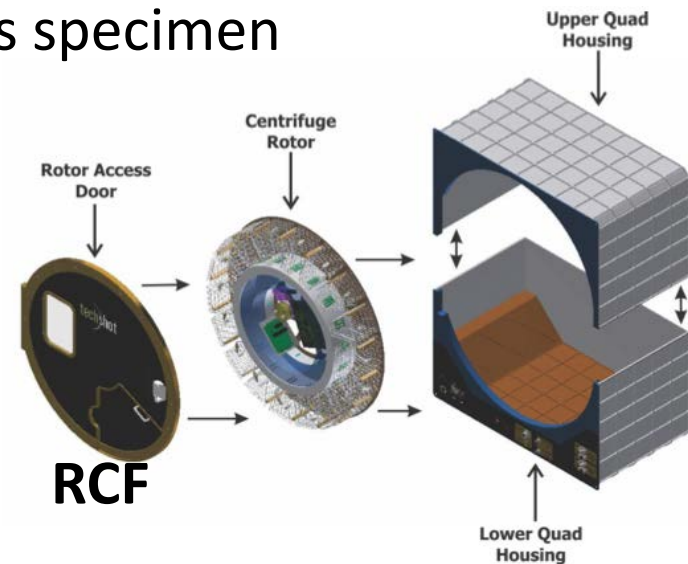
The RCF will be transported to ISS in separate pieces and assembled on-orbit by first attaching the two quad housing units together and then installing the centrifuge rotor and rotor access door.
